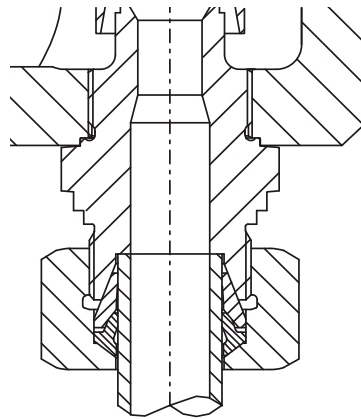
Swagelok compression fitting with double locking ring
